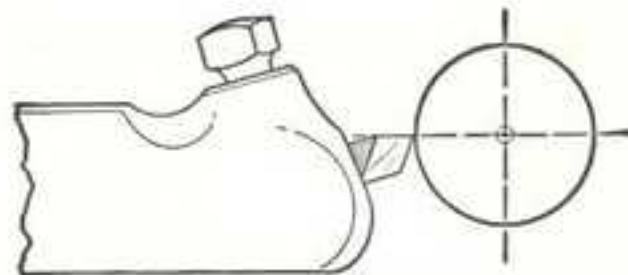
Top of Cutter Bit Set On Center for Cutting Screw Threads
